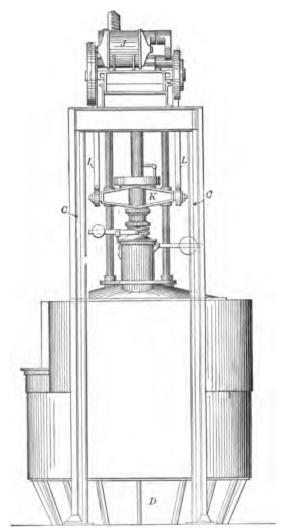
Elevation of Fraser-Talbot Gas-Producer.
